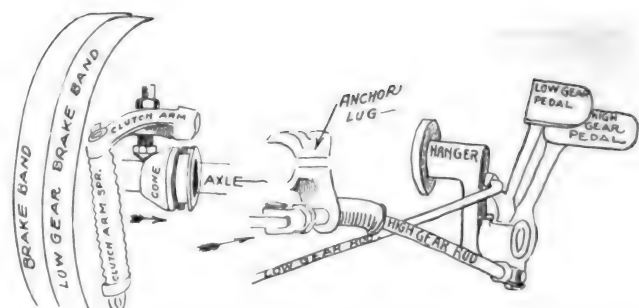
The cone is out and the clutch arm drawn down toward the axle, expanding the clutch.
